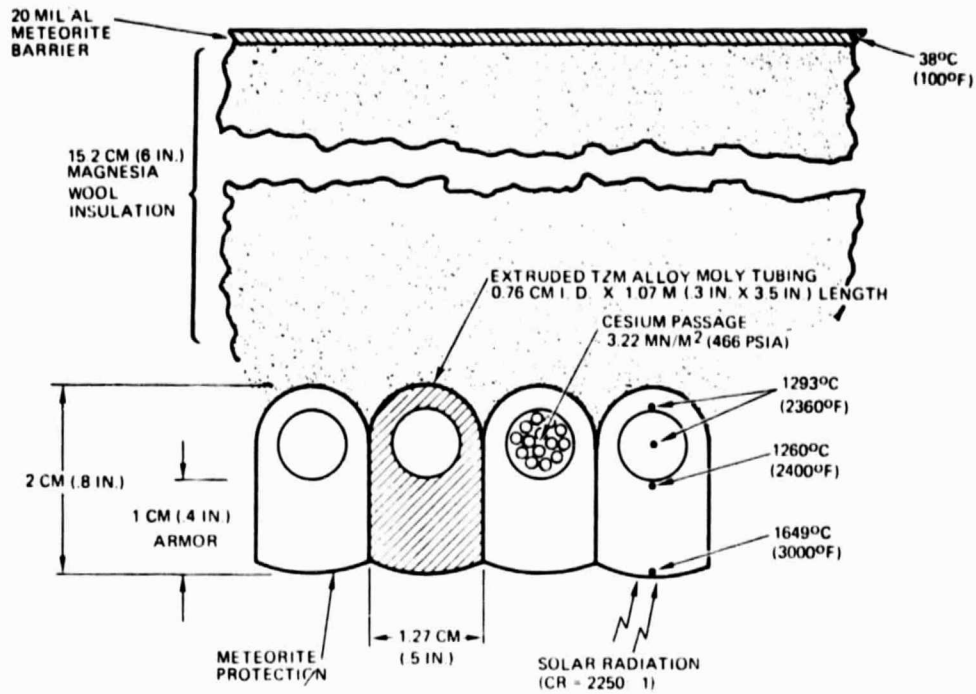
Cesium Boiler Panel Cross-Section
